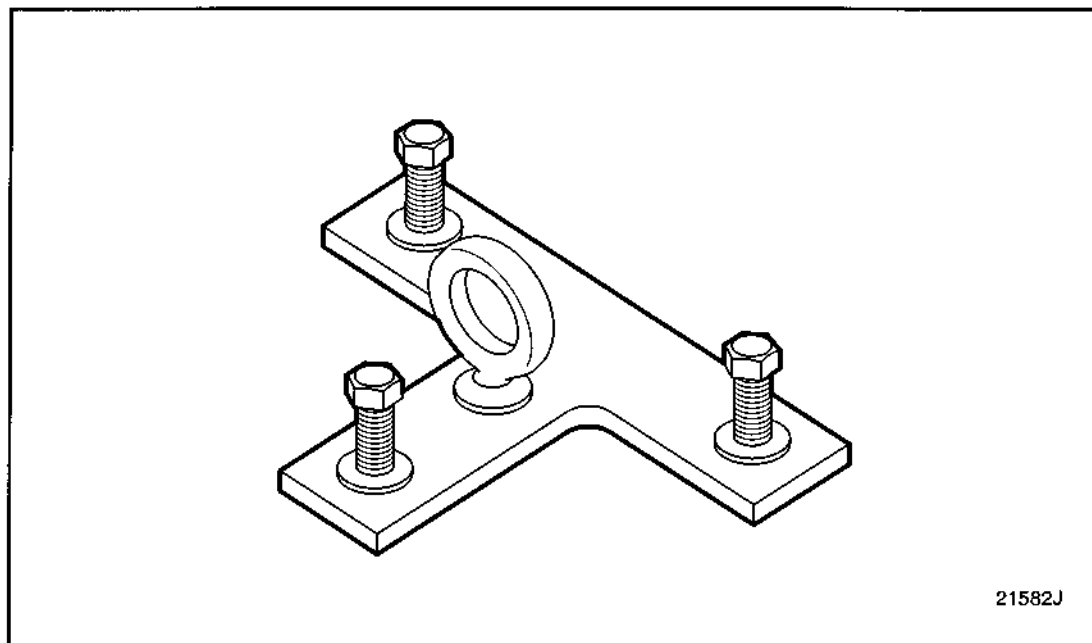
Cylinder Head Lifting Fixture,J 35641-A
